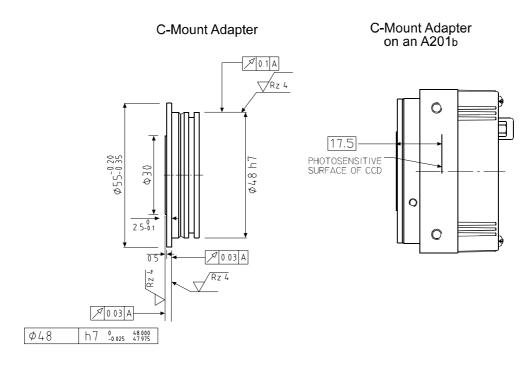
C-Mount Adapter Dimensions (in mm)
